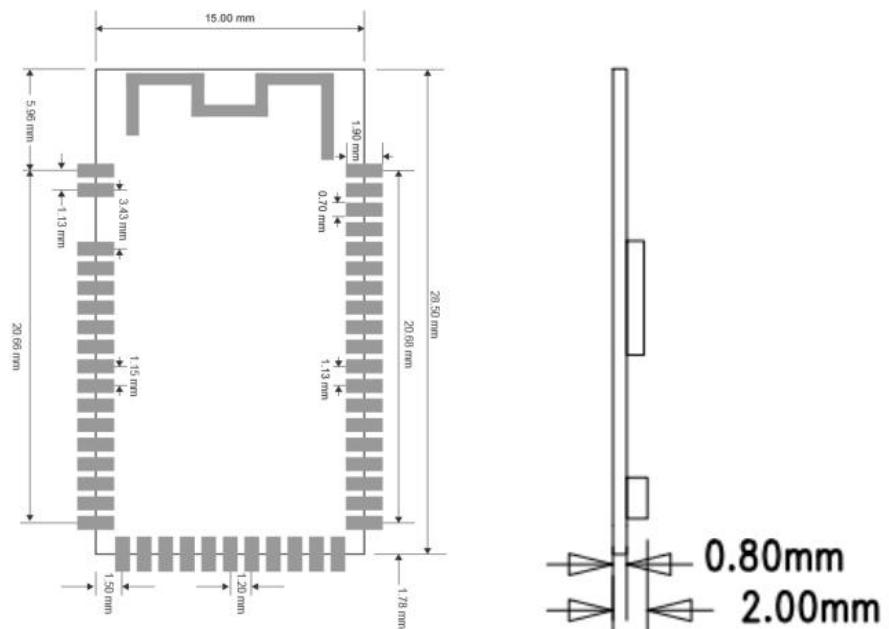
Recommended PCB Packaging of BT5GMD-B47P
